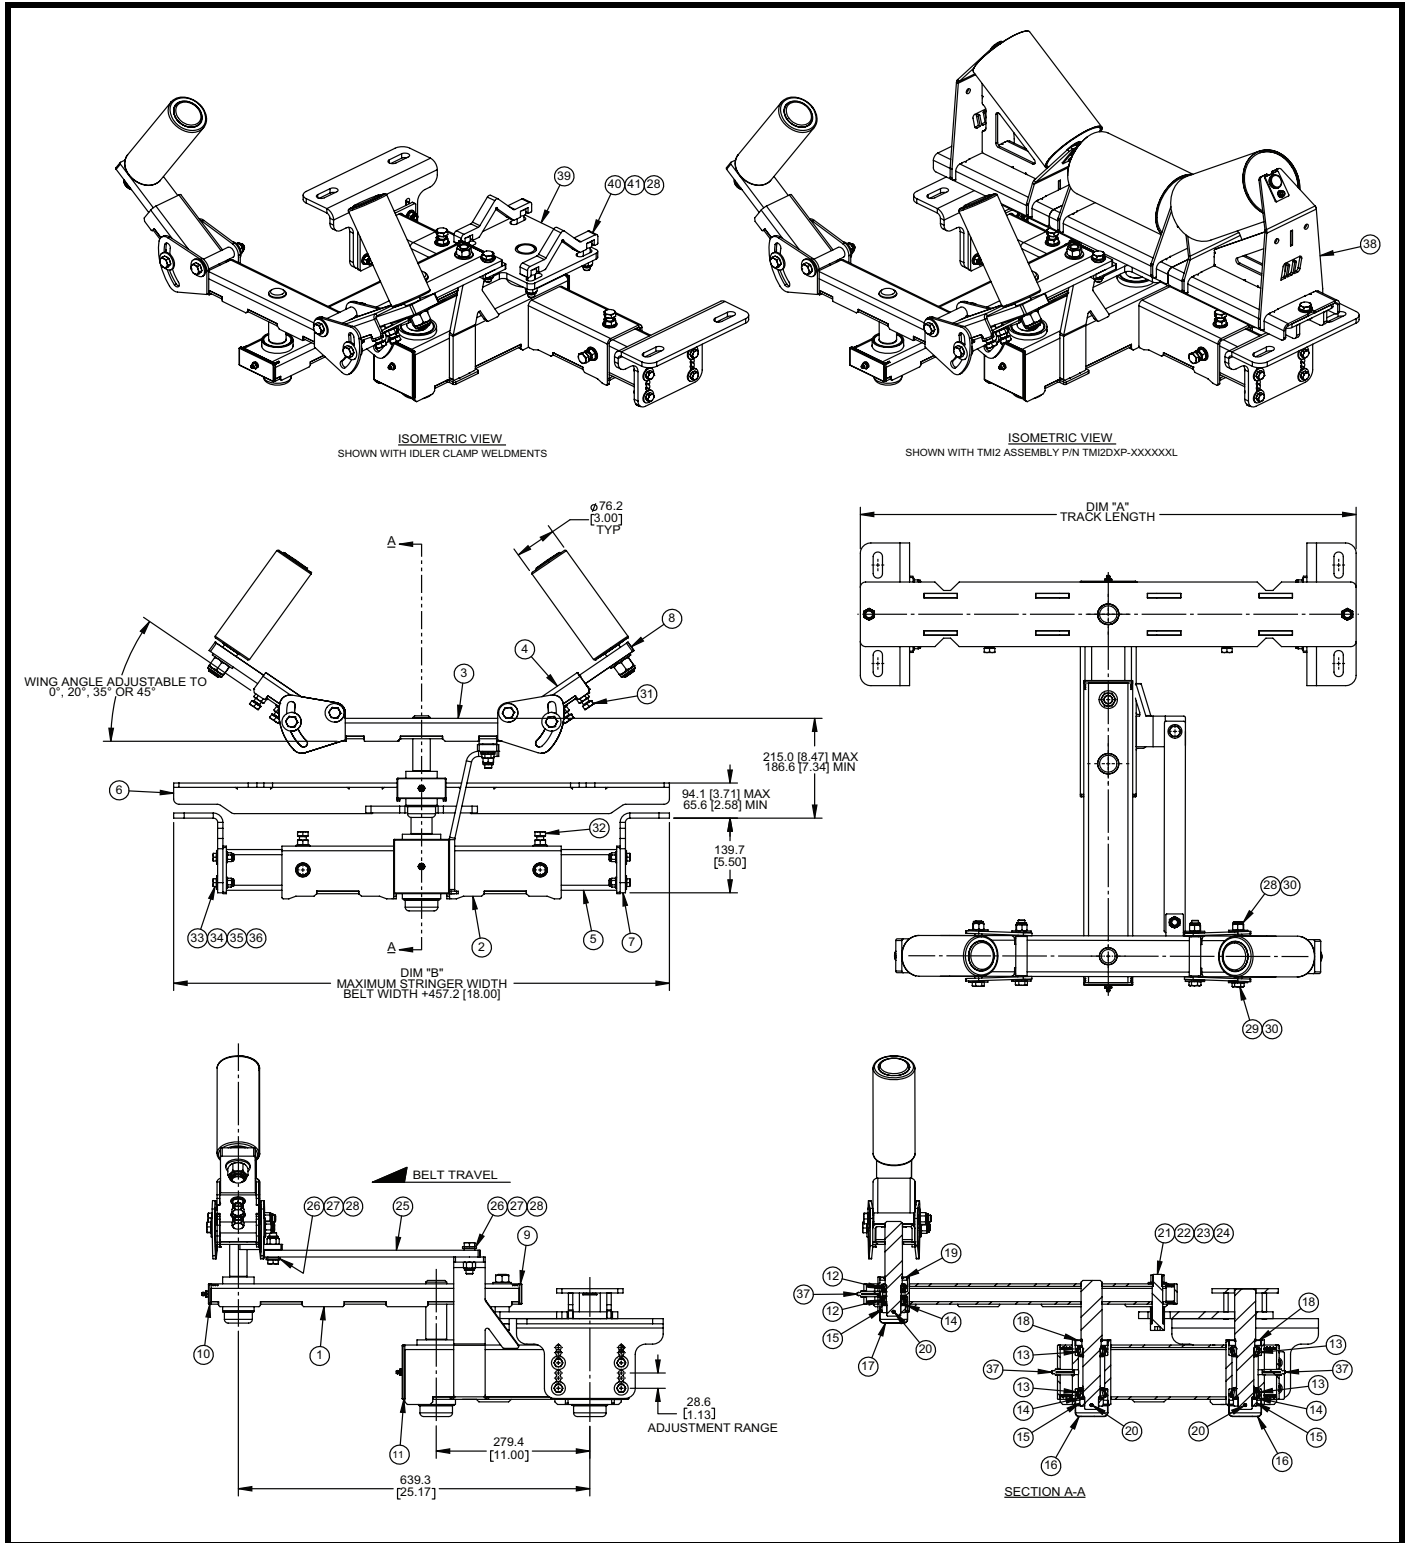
Martin® Tracker™ HD, P/N CTMHUSXXXXXX (Sheet 1 of 2)
